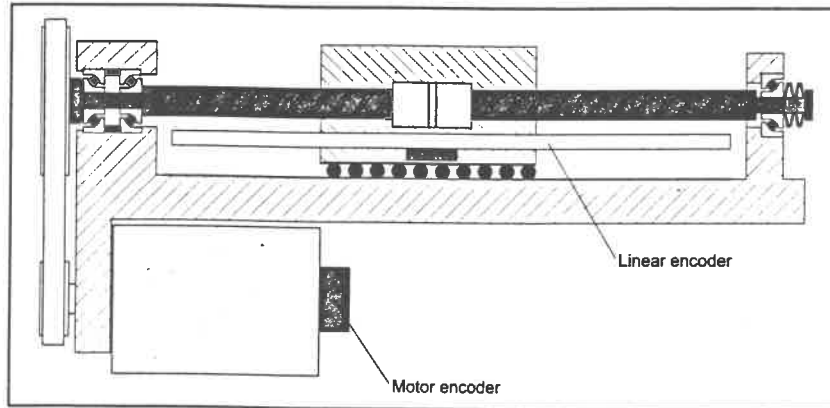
Typical drive system of a numerically controlled machine tool with linear scale on the slide and rotary encoder on the motor.
